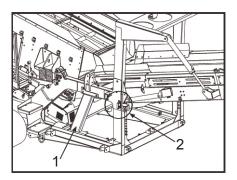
Tail Conveyor Mounts and Slide Ram Pin
